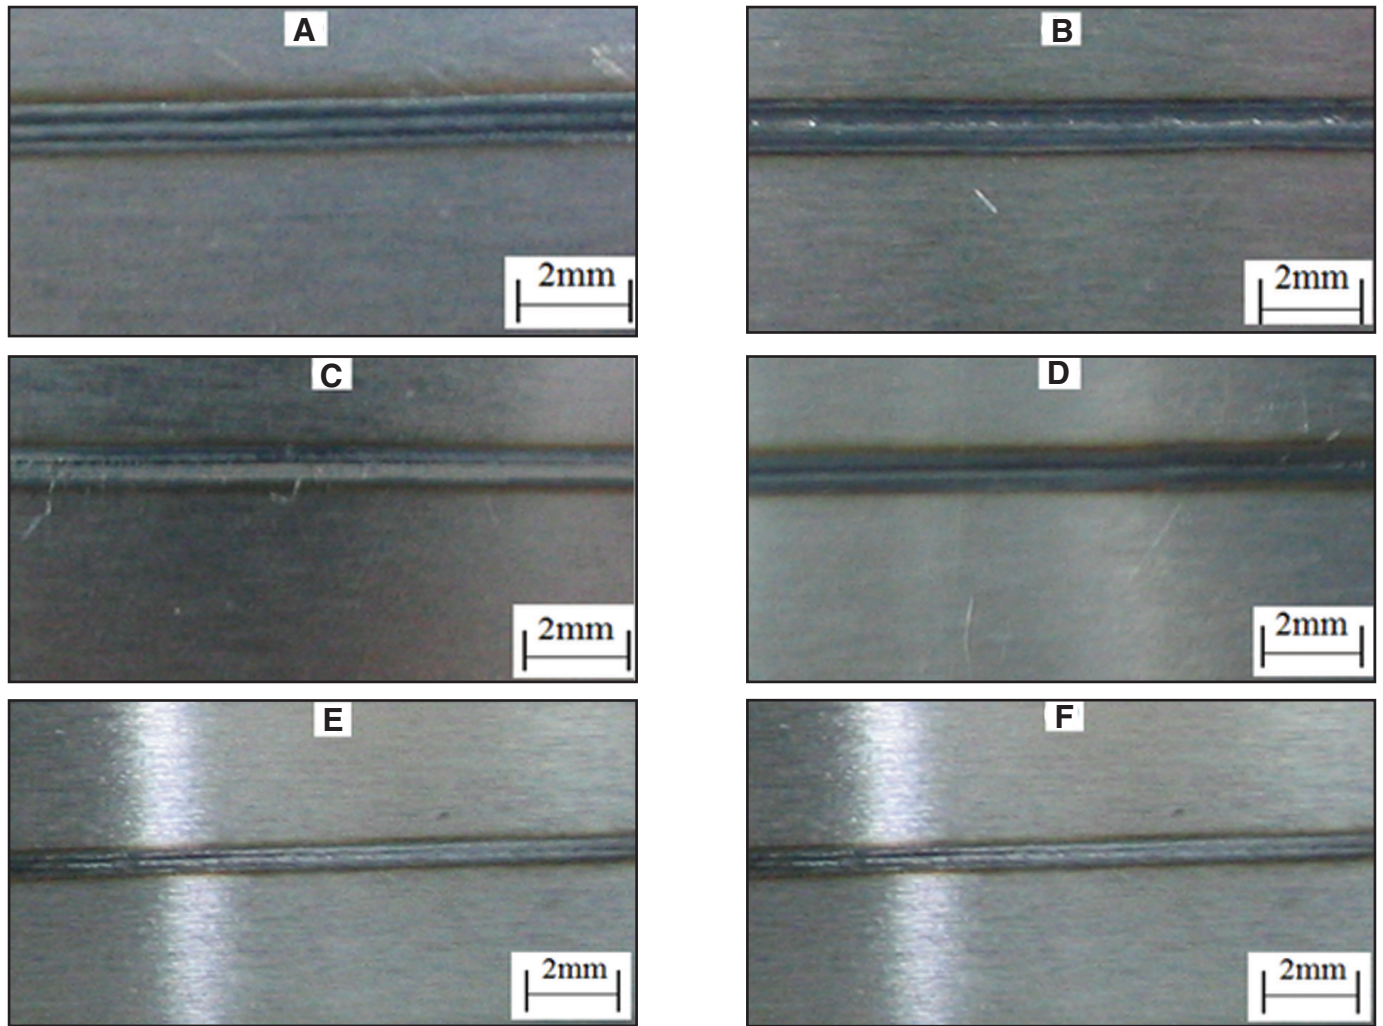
Surface appearance of weld from laser butt joint welding.
